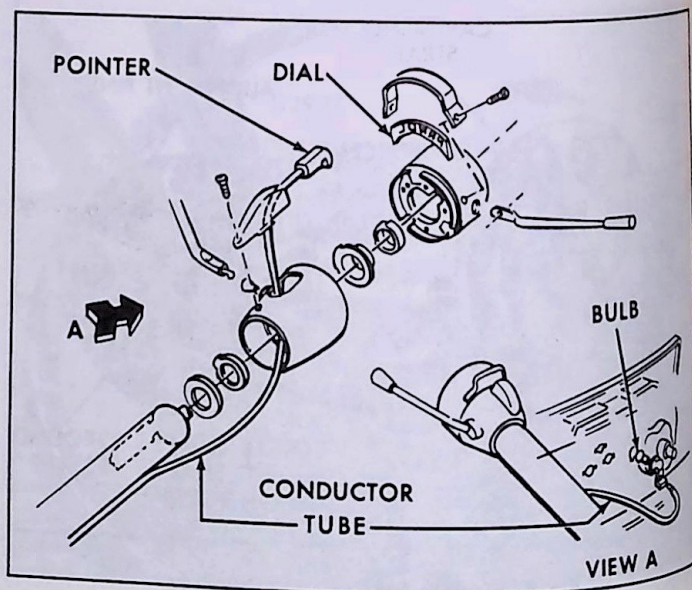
Conductor Tube (Automatic Transmission Indicator Light)
